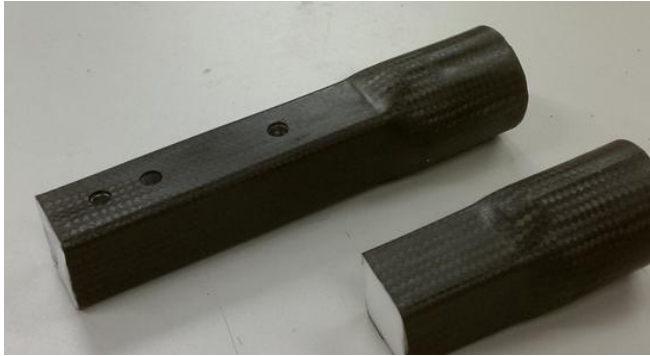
Adapters used to transfer torque from the pulley to the shaft (below) and from the shaft to the blades (above)
